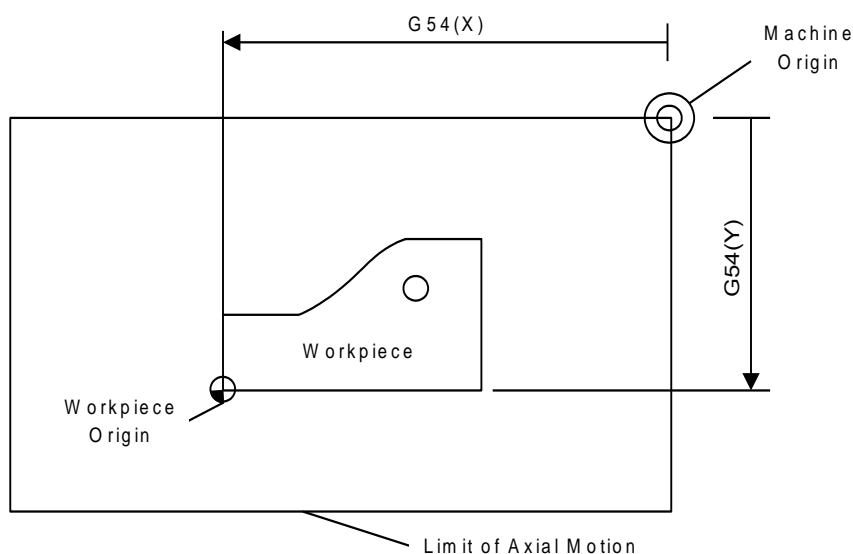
The relation between workpiece offset and machine coordinate system
